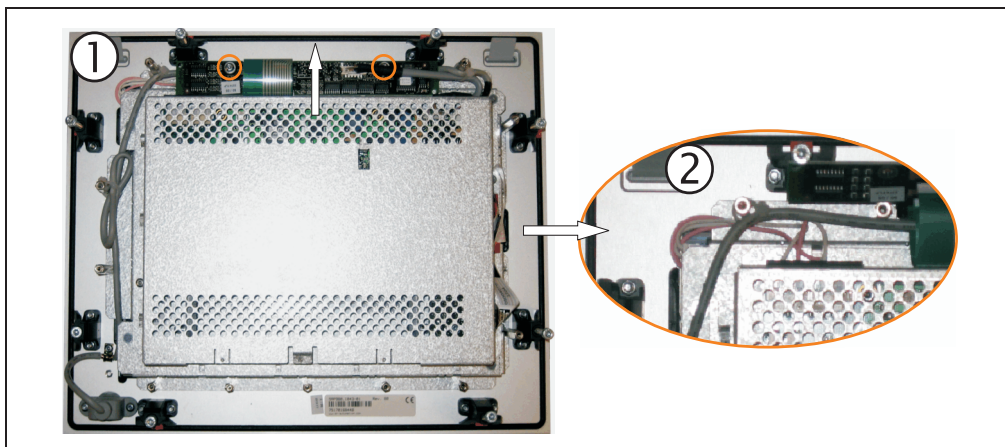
10.4" Automation Panel - Unscrew and unplug
